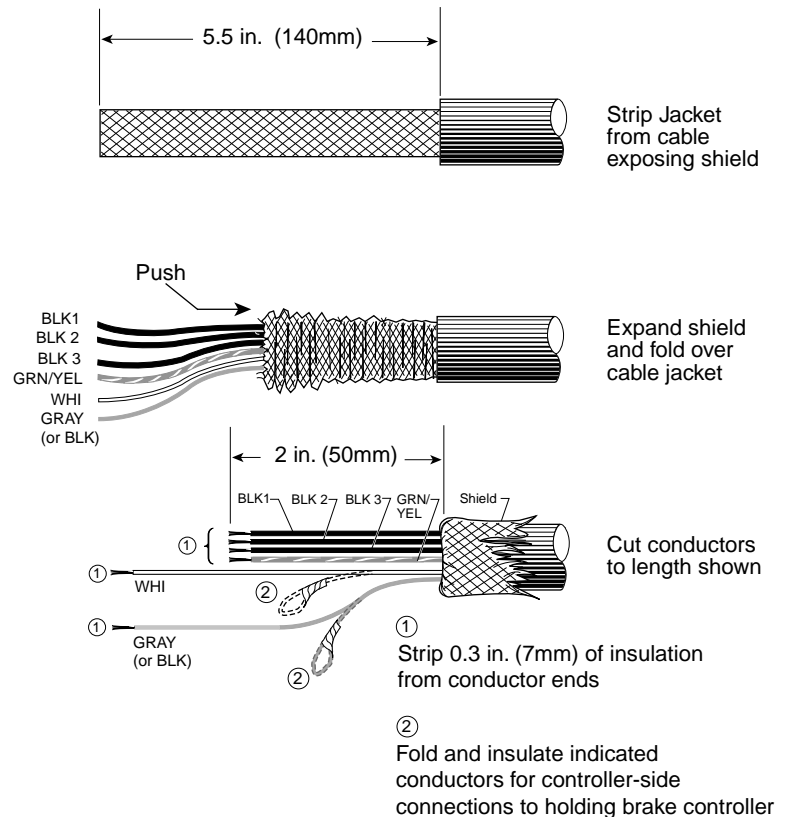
Preparing the motor cable termination to the holding brake controller.
